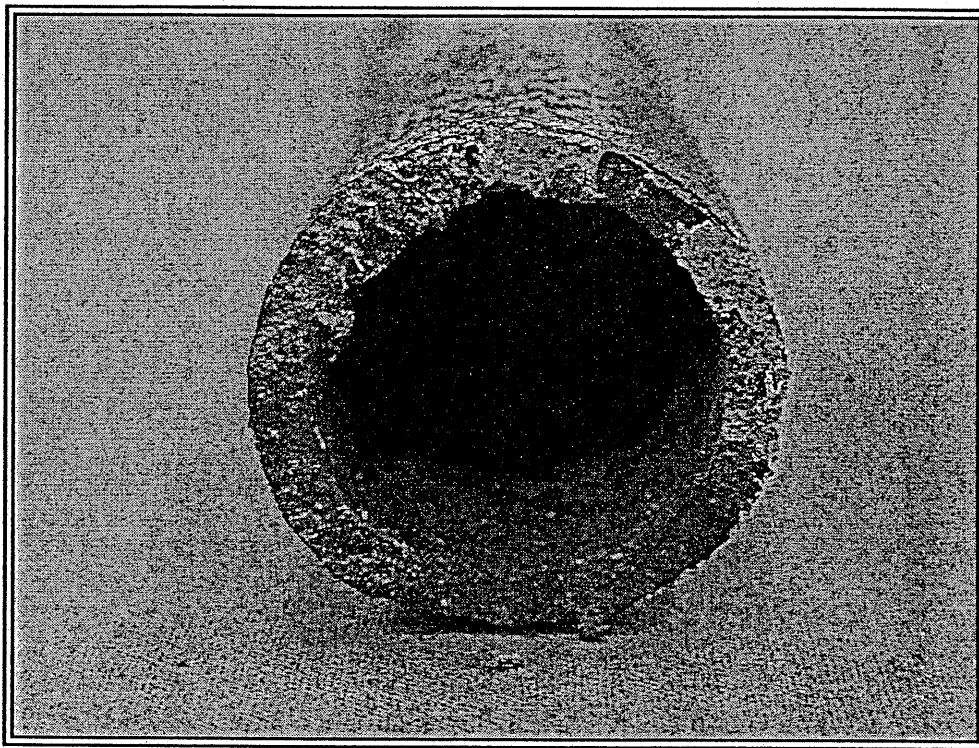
Photograph of the fracture surface on the end of the conduit tube
